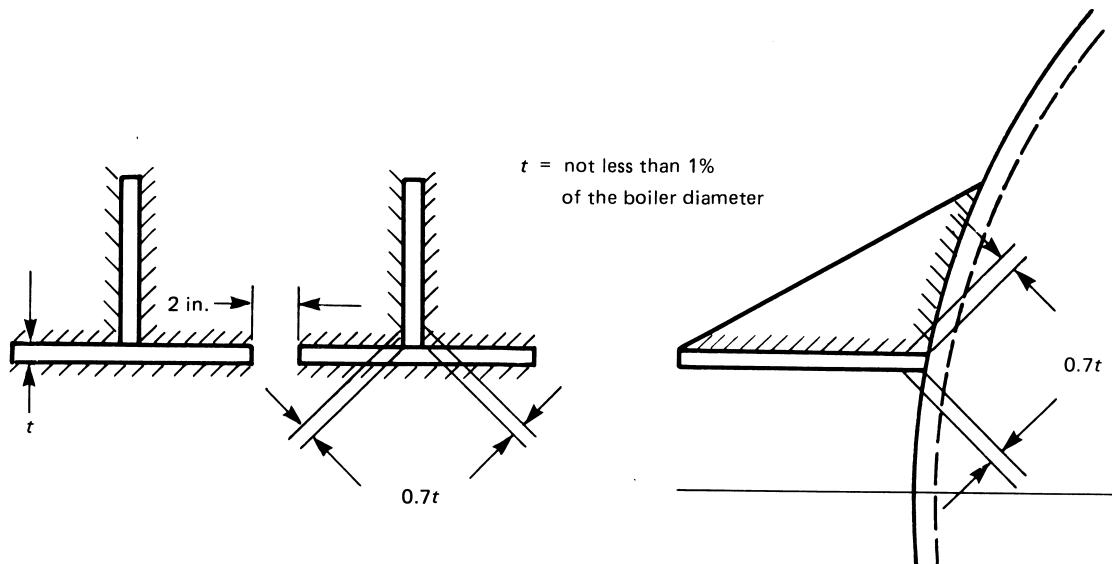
SPACING AND WELD DETAILS FOR WALL-SUPPORT LUGS SET IN PAIRS ON HORIZONTAL-RETURN TUBULAR BOILERS
